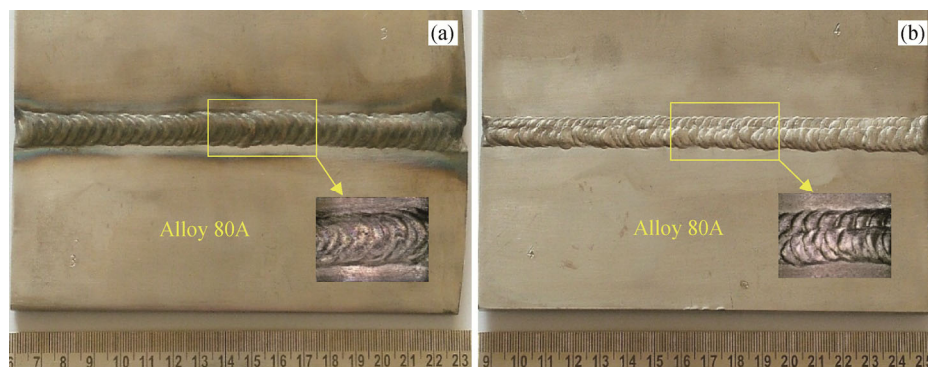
Photographs of weldments fabricated with ERNiCr-3 filler wire: (a) GTAW; (b) PCGTAW.
